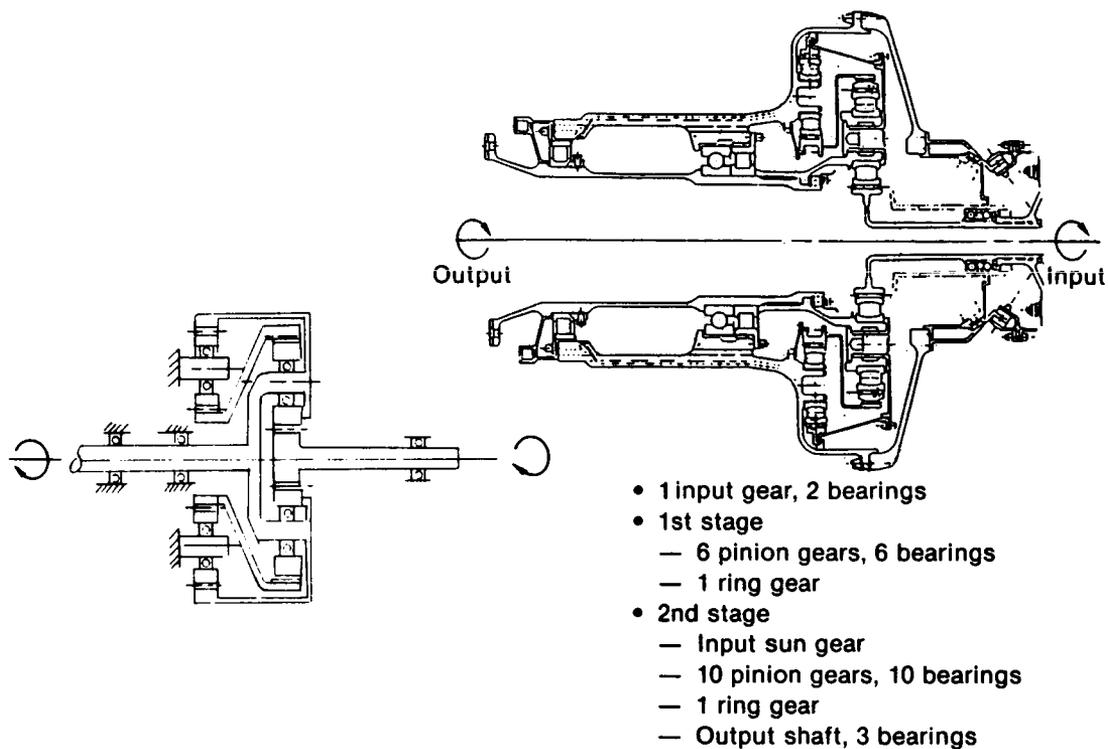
In-Line Split Path Reduction Gear Concept - This compact, lightweight system includes 20 gears and 21 bearings. (J27638-86)
